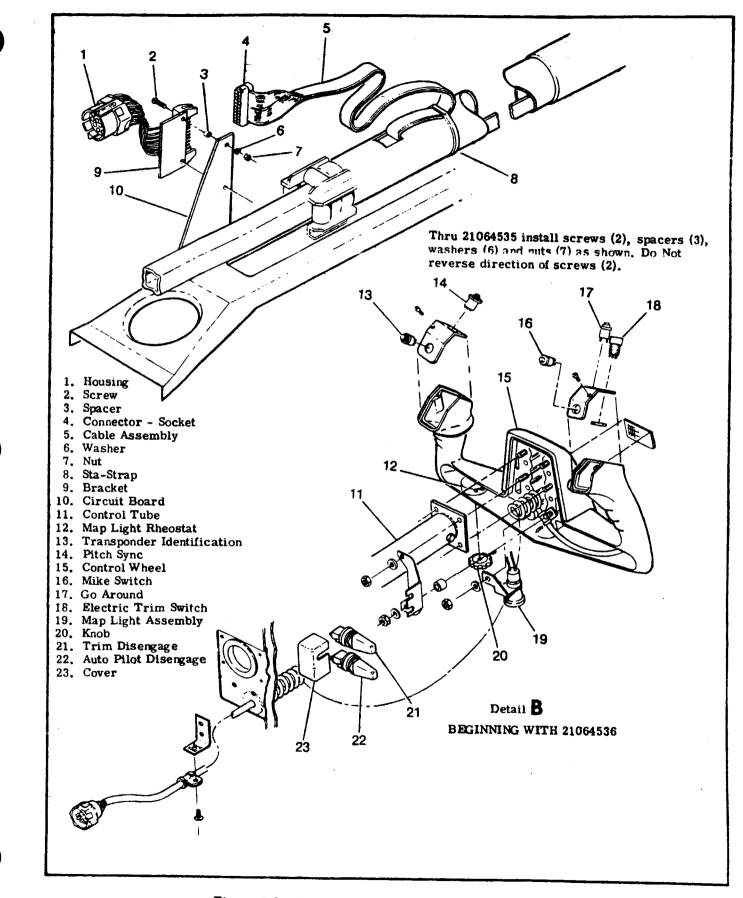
Control Column Installation (Sheet 4 of 5)
